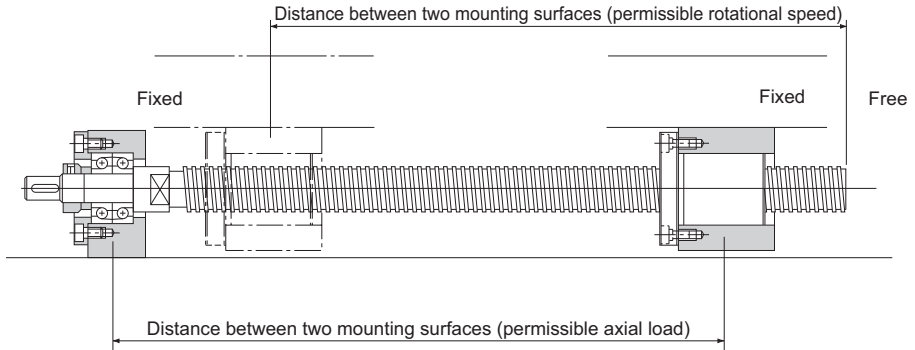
Screw Shaft Mounting Method: Fixed - Free
